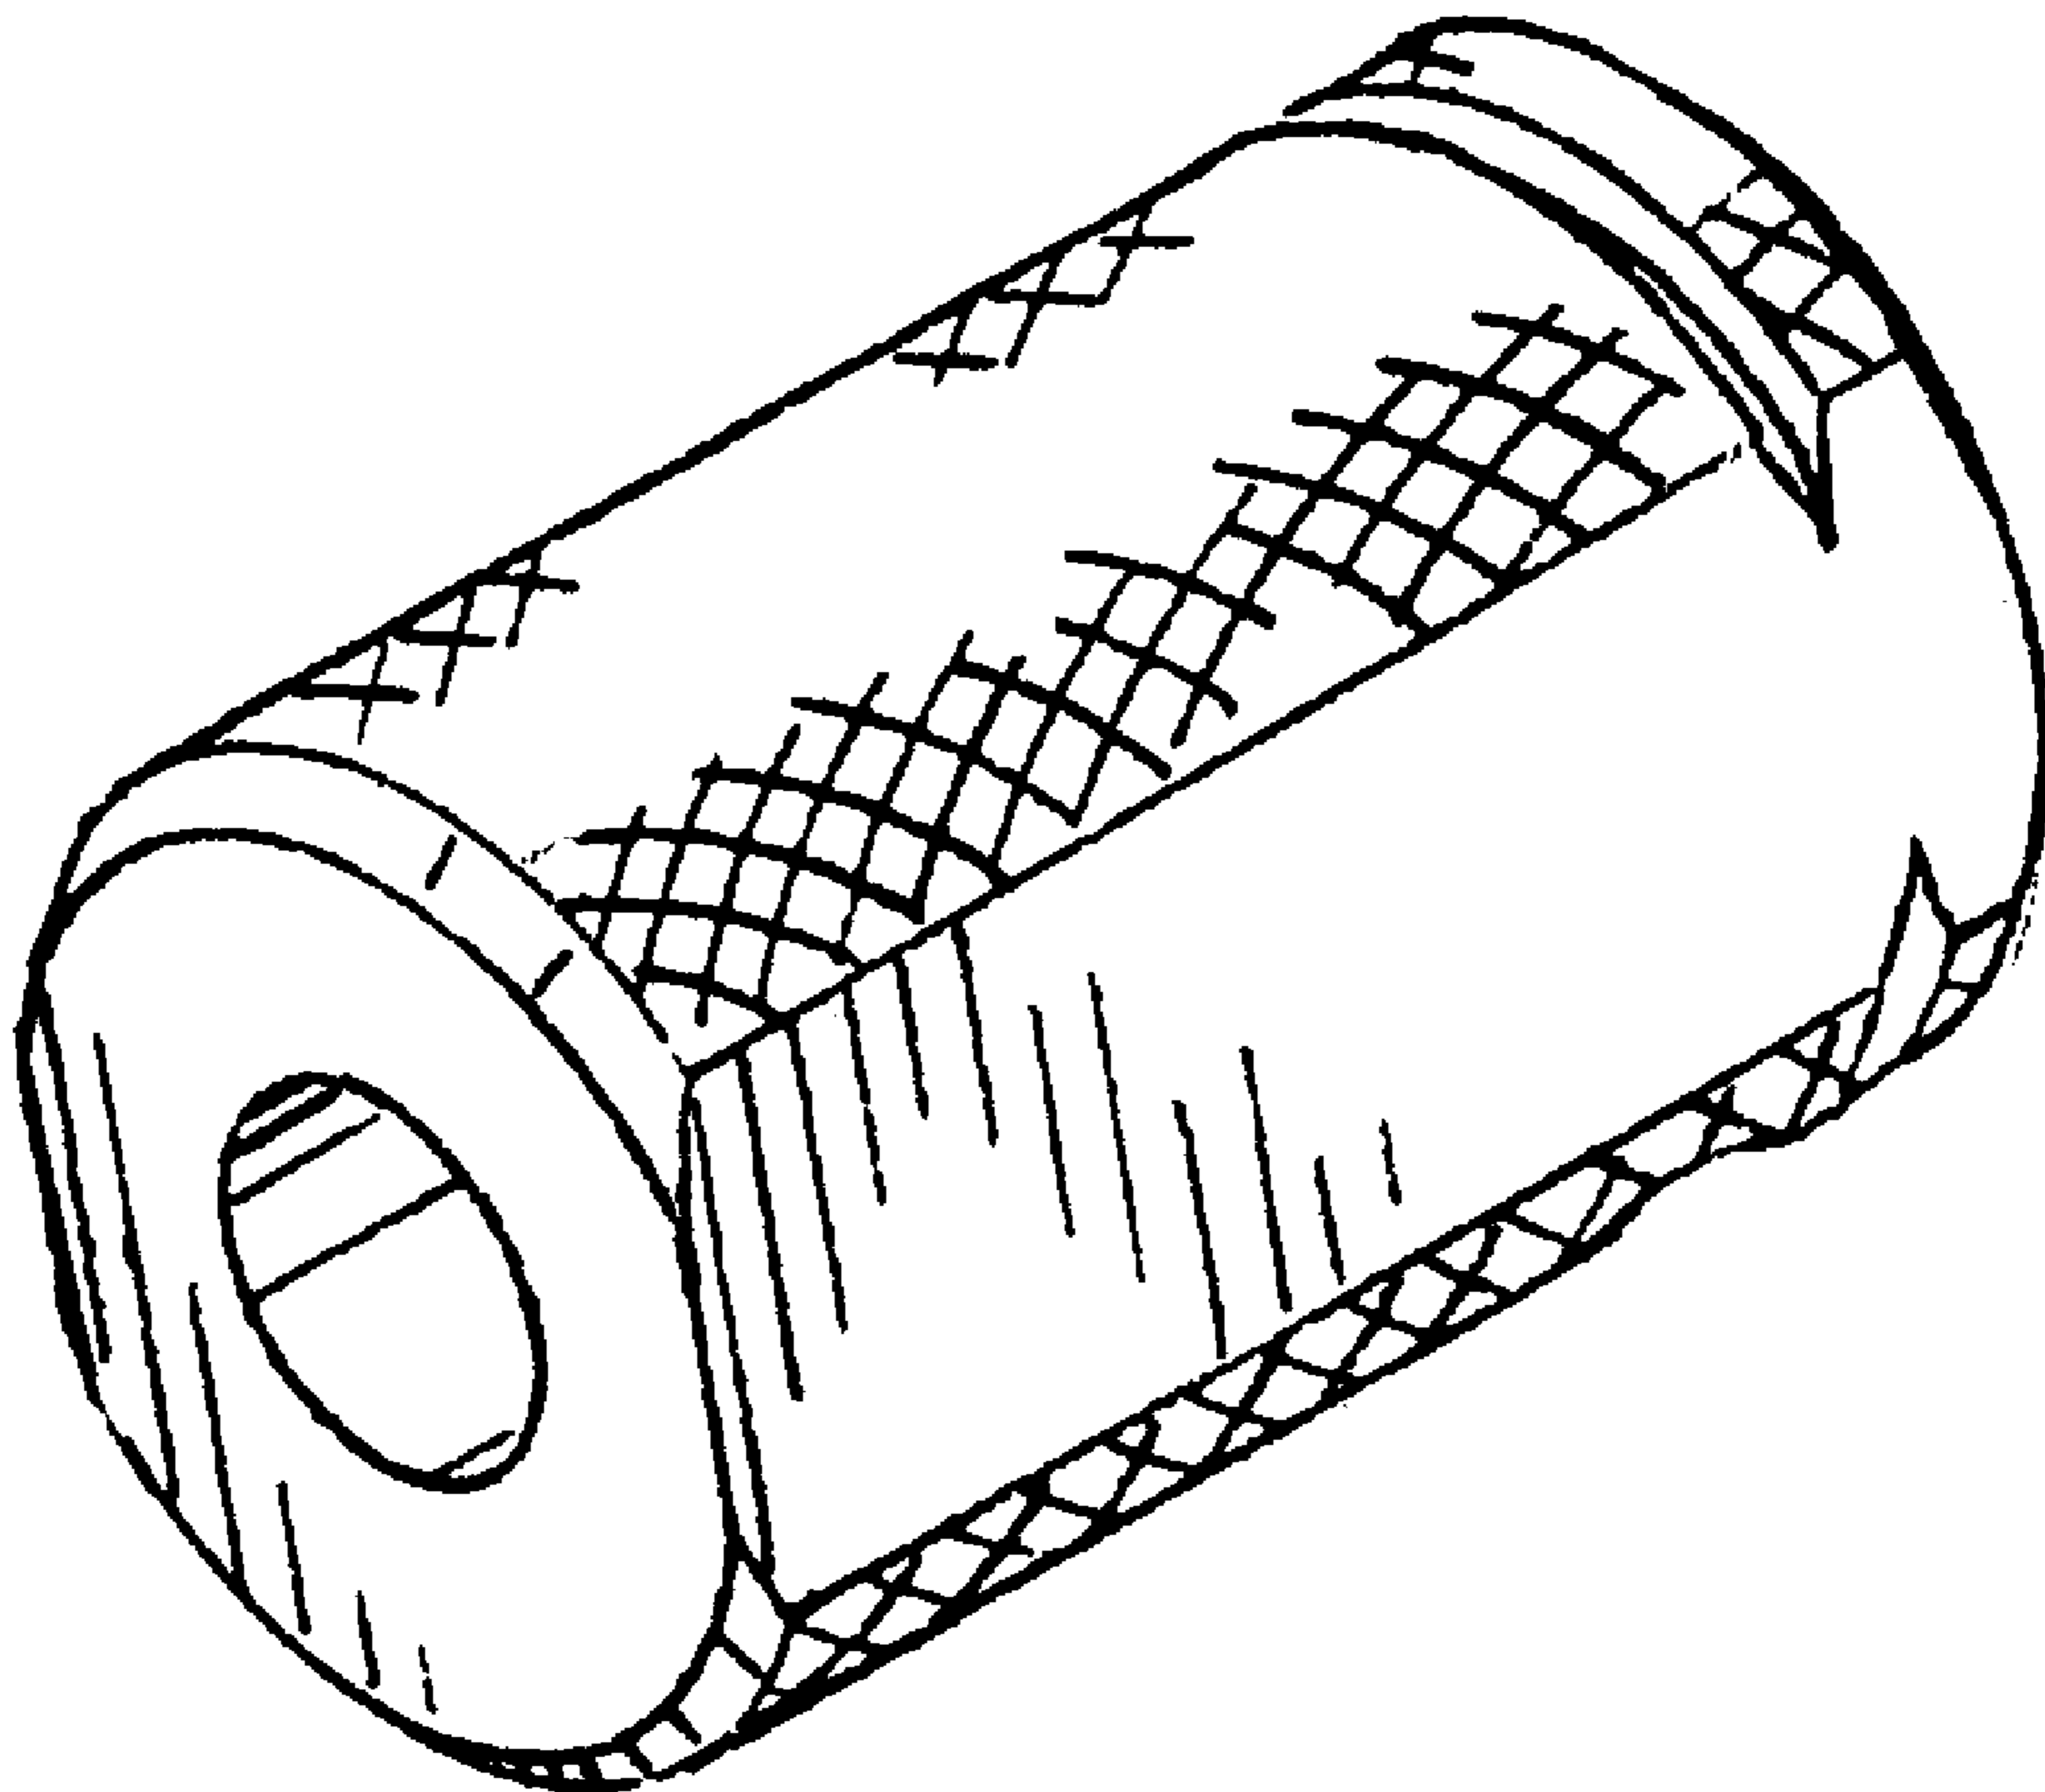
is a perspective view of a barrel type flush pin gage illustrating my new design;
